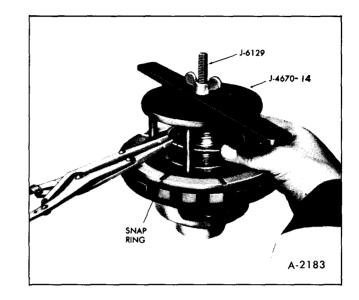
Removing Intermediate Clutch Retaining Snap Ring
